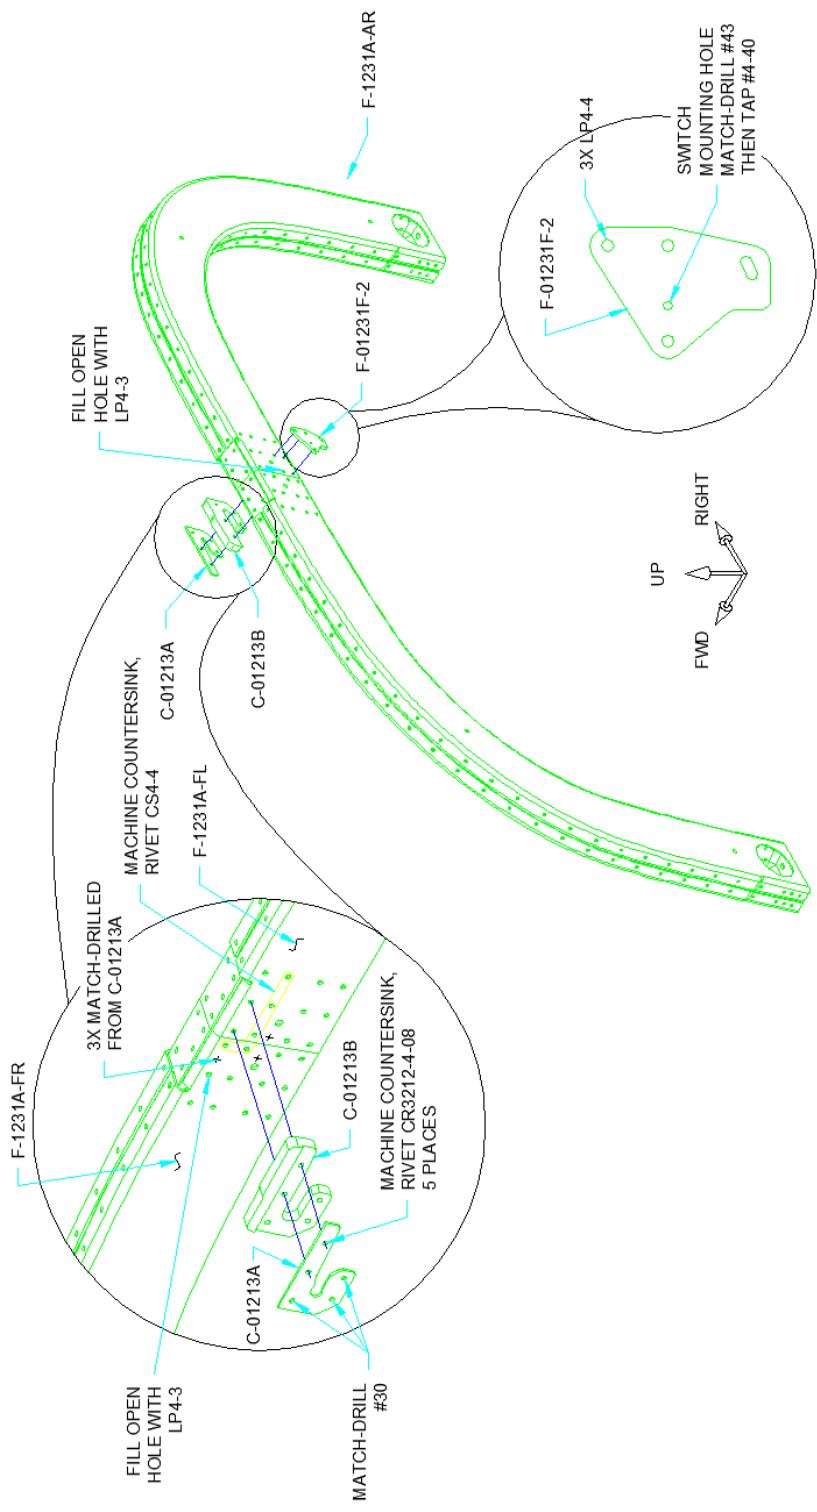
CANOPY HANDLE ASSEMBLY
